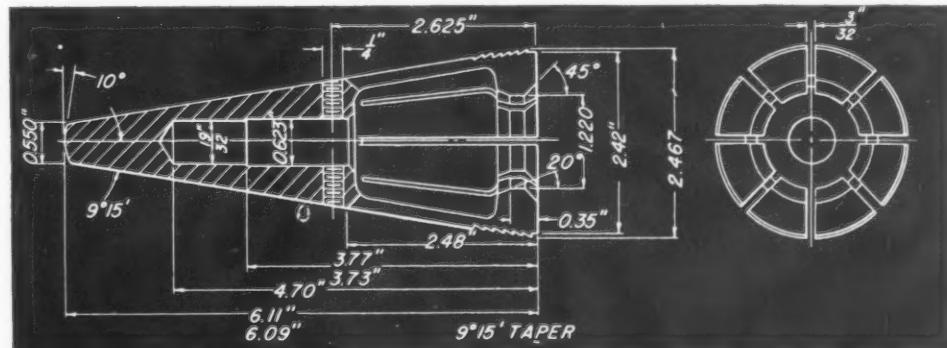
Cone tube-holder for a textile machine which was milled by the use of the automatic fixture shown in Fig. 2
